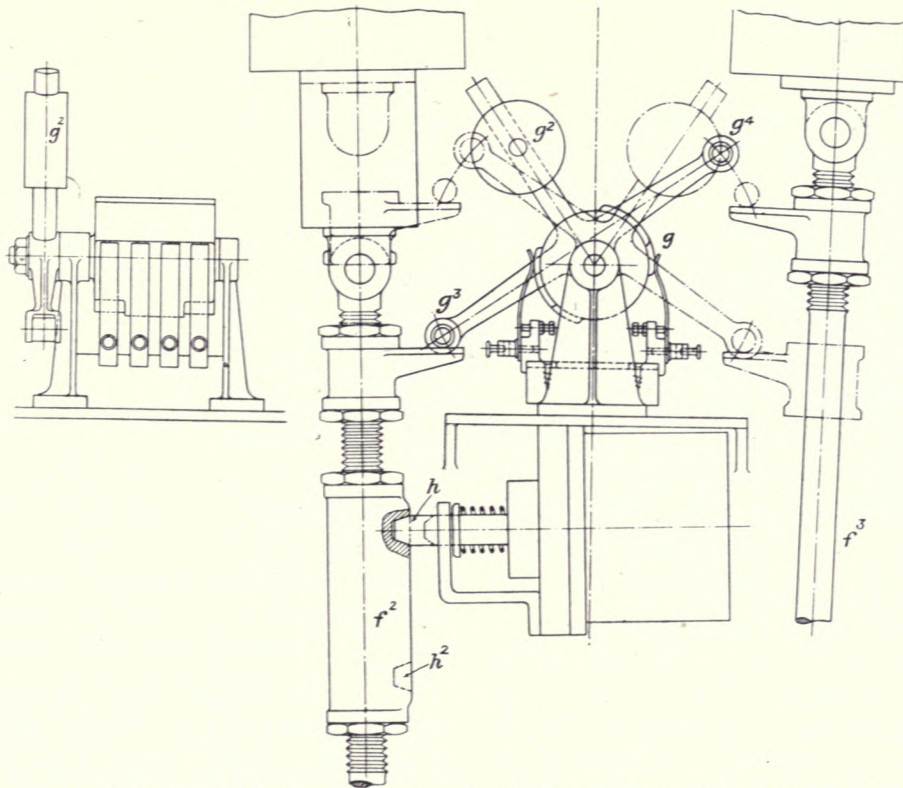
Details of Rotary Switch, Trip Gear and Locking Gear.
